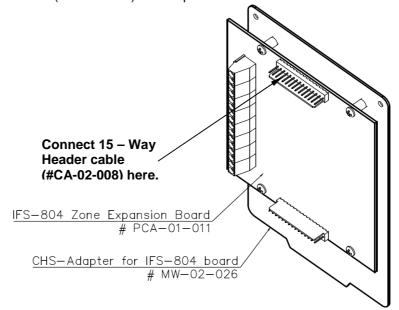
, IFS-804 Zone Expansion Board supplied with the Kit
